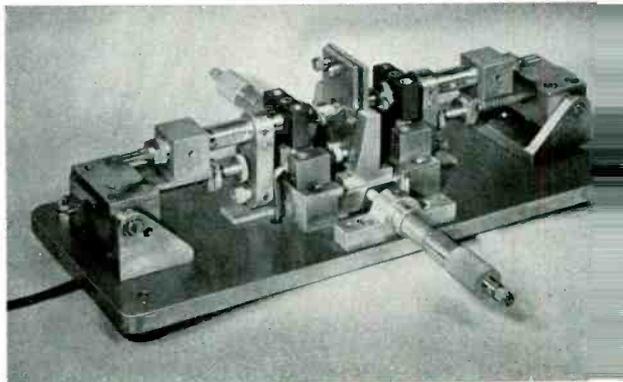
Lead wire soldering tool with a plate holder containing an EDT crystal plate, with disks already attached, in center position. This tool, by interchangeable noses, is also used to attach the combination adhesive disks to the plate. Each headed wire registers in accurate alignment on its corresponding disk and is soldered in a radiation heat cycle for minimum thermal stress
